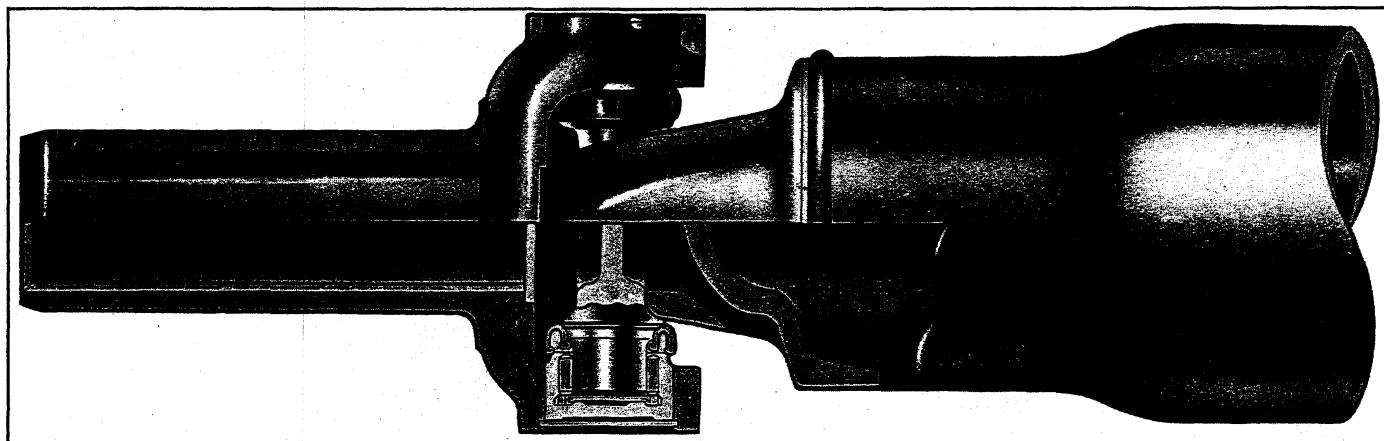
Light-Duty Propeller Shaft Cross-Section (Dana Design)
